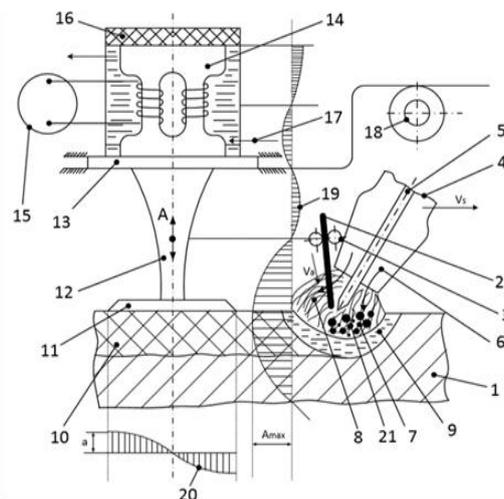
The scheme of introducing the ultrasonic in welding bath at right angles to the direction of welding: 1 - base material; 2 - filler material, 3 - training rollers; 4 - welding head; 5 - wolfram electrode; 6 - protective gas; 7 - electric arc; 8 - protective curtain of welding bath and electric arc; 9 - welding bath; 10 - deposited layer; 11 - the active part of ultrasonic concentrator; 12 - ultrasonic energy concentrator; 13 - nodal flange; 14 - ultrasonic transducer; 15 - ultrasonic generator; 16 - acoustic insulating; 17 - the coolant; 18 - guide rollers; 19 - variation diagram of amplitude of particle velocity longitudinally ; 20 - variation diagram of amplitude of particle transverse; 21 - drops of filler material; v_s - welding direction; v_a - the advance direction of the wire-electrode.
